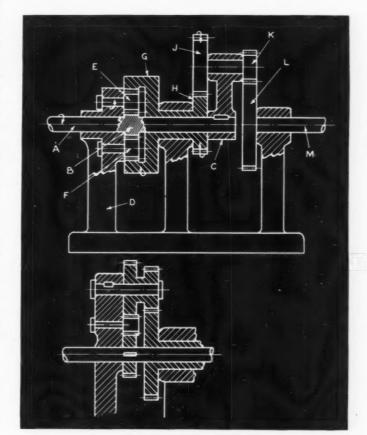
(Top) Planetary gear type indexing device that provides fixed dwell periods in the movement of follower-shaft (M). (Bottom) Alternate gear arrangement permits the elimination of internal gear (G).
